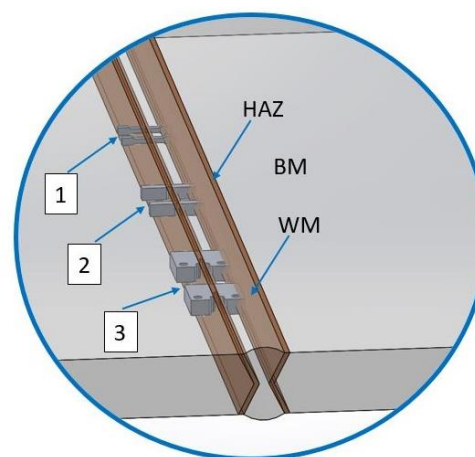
Sampling scheme from the vessel head: tensile specimen -1; Charpy specimen -2; CT specimen -3.
